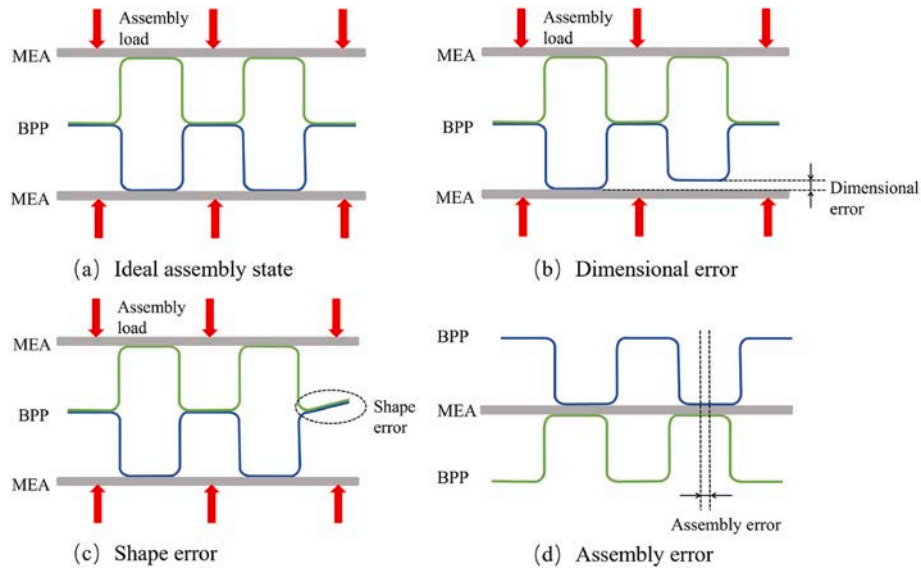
Error types of BPP: (a) ideal assembly state, (b) dimensional error, (c) shape error, (d) assembly error.
